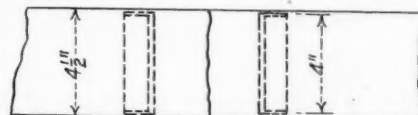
Blocks Are Welded in the Corners to Give the Shoe or Wedge an End Bearing
